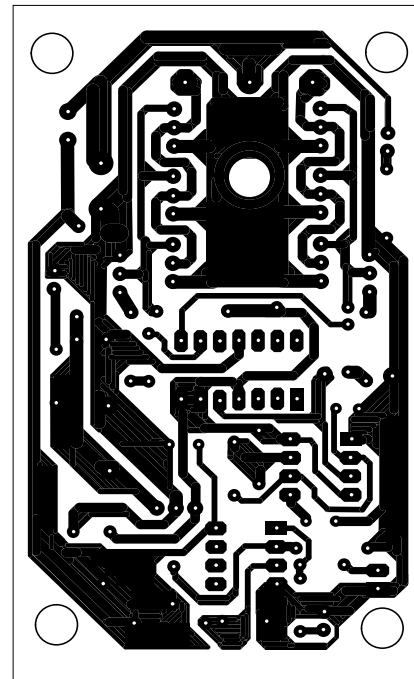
Actual-size, single-side PCB for medium-power inverter
